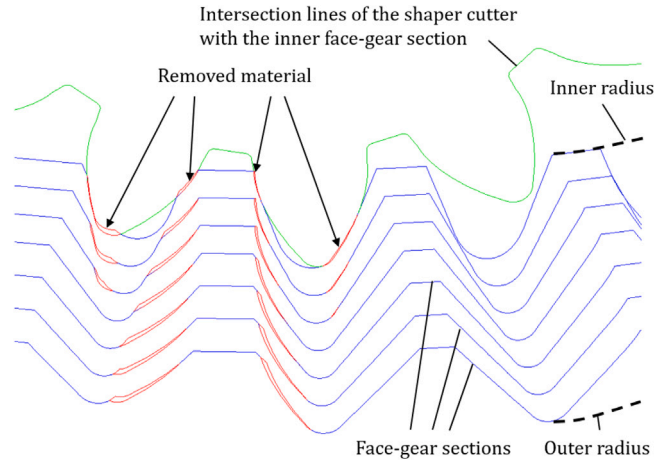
Simulation of the chip removal for the gear shaping of a face-gear for a selected cutting stroke. The theoretical material removal is determined for a given number of sections across the tooth width.
